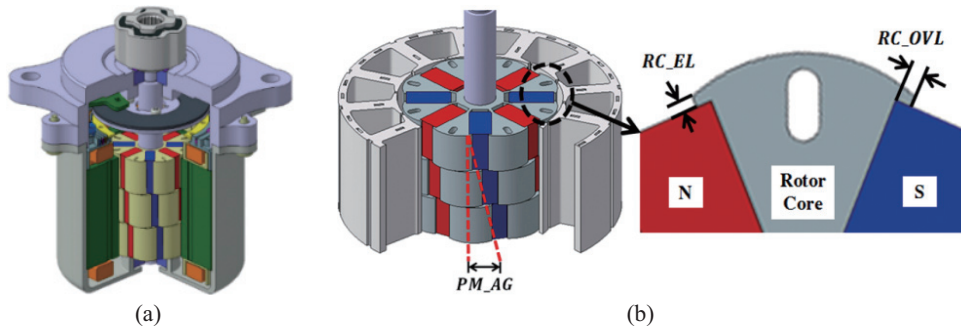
(a) Proto type 3-step skewing spoke type BLAC Motor, (b) Rotor Skew model for minimizing cogging torque.
